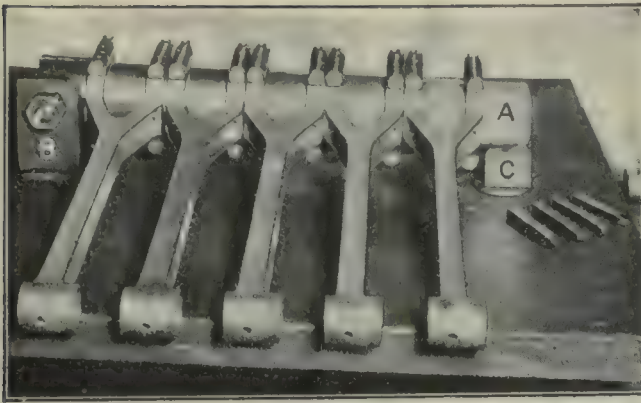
FIXTURE FOR NUMBERING RODS AND CAPS
